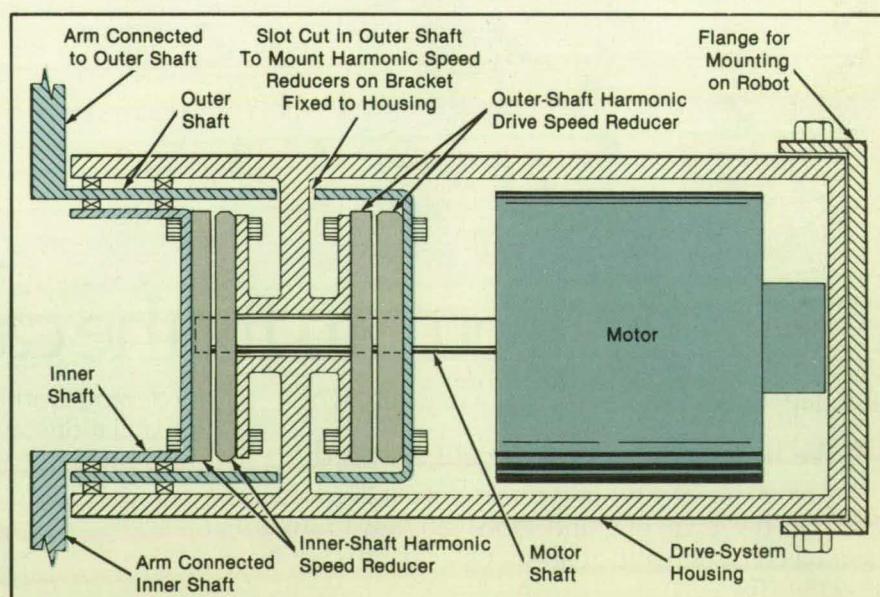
The Compact Rotary Drive contains two collinear harmonic speed reducers driven by the same motor.
